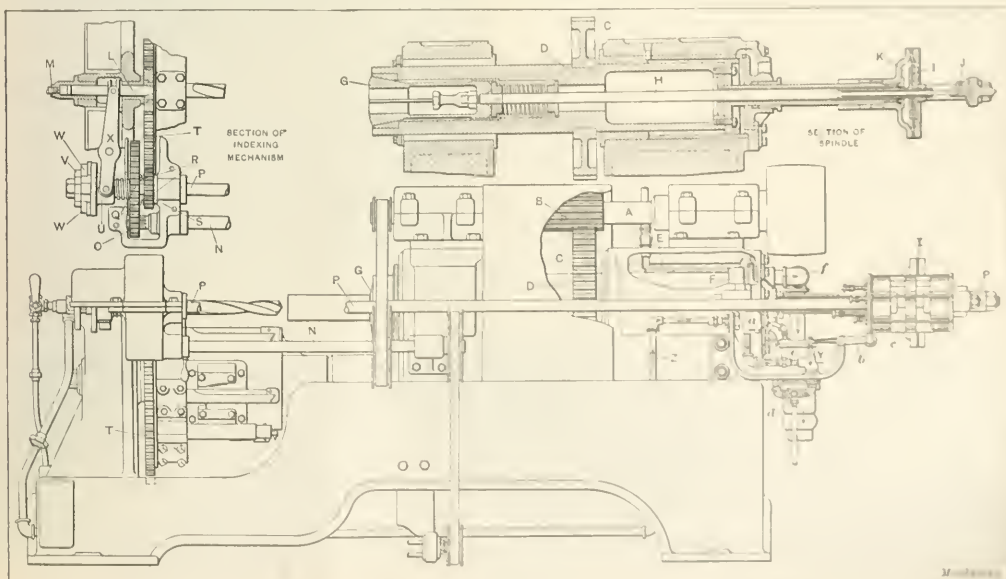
Side Elevation of Lathe from Rear and Sections of Spindles and Indexing Mechanism
